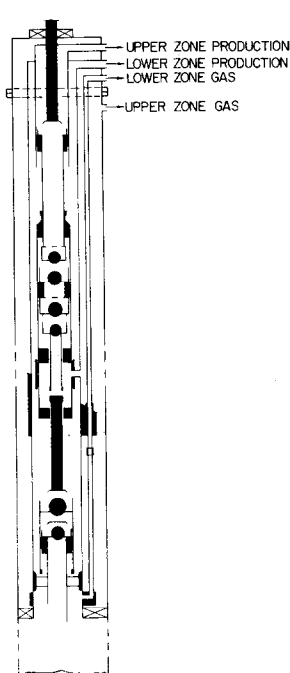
SINGLE STRING, SINGLE PACKER, HOLLOW ROD TYPE
